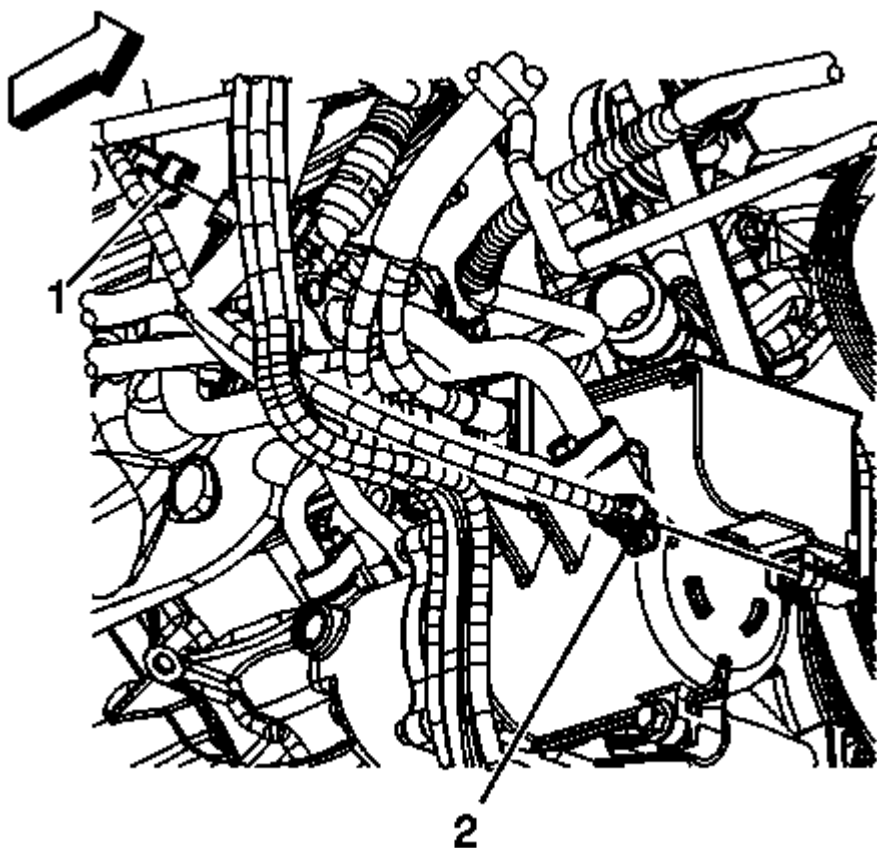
A/C Refrigerant Pressure Sensor Harness And Connector
